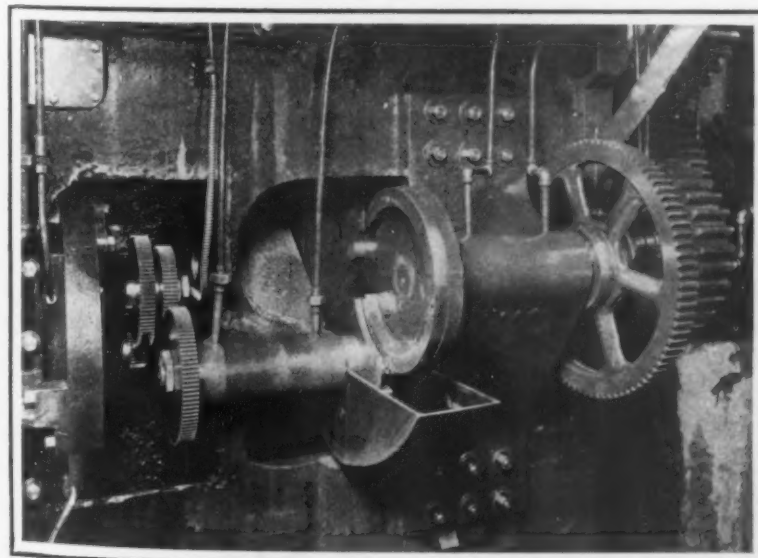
Toothed Segments for Actuating the Head Feed and the Tool Clamping
